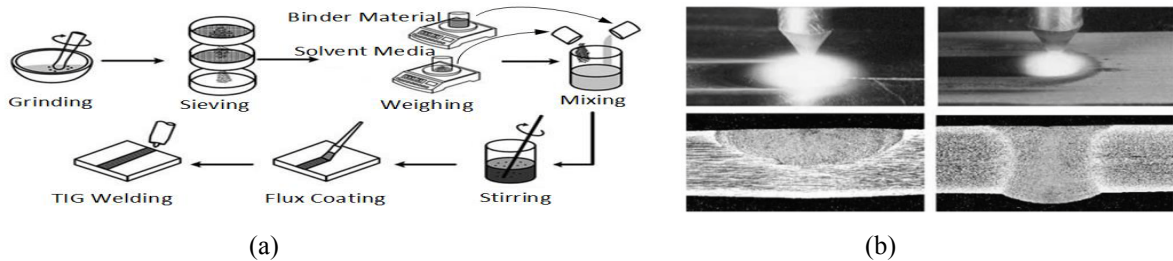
(a) Preparation procedures of activated flux (A-TIG) welding [33]; (b) Schematic of (Left Side) TIG and (Right Side) ATIG Welding [34]
